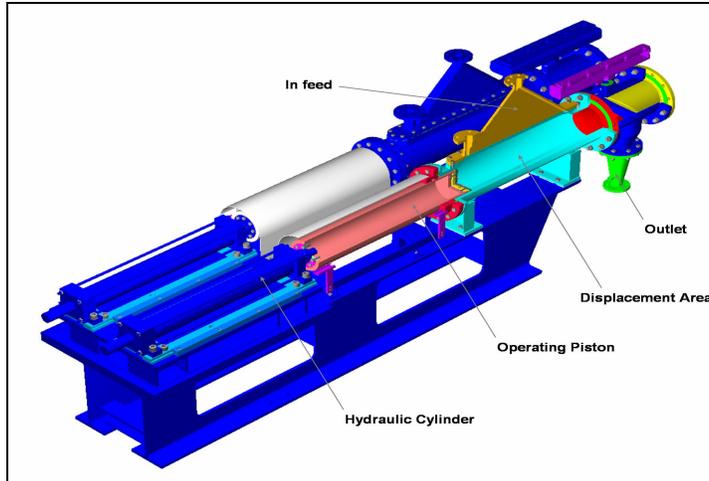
Key machine parts of the PFD Dense Phase Conveyor
